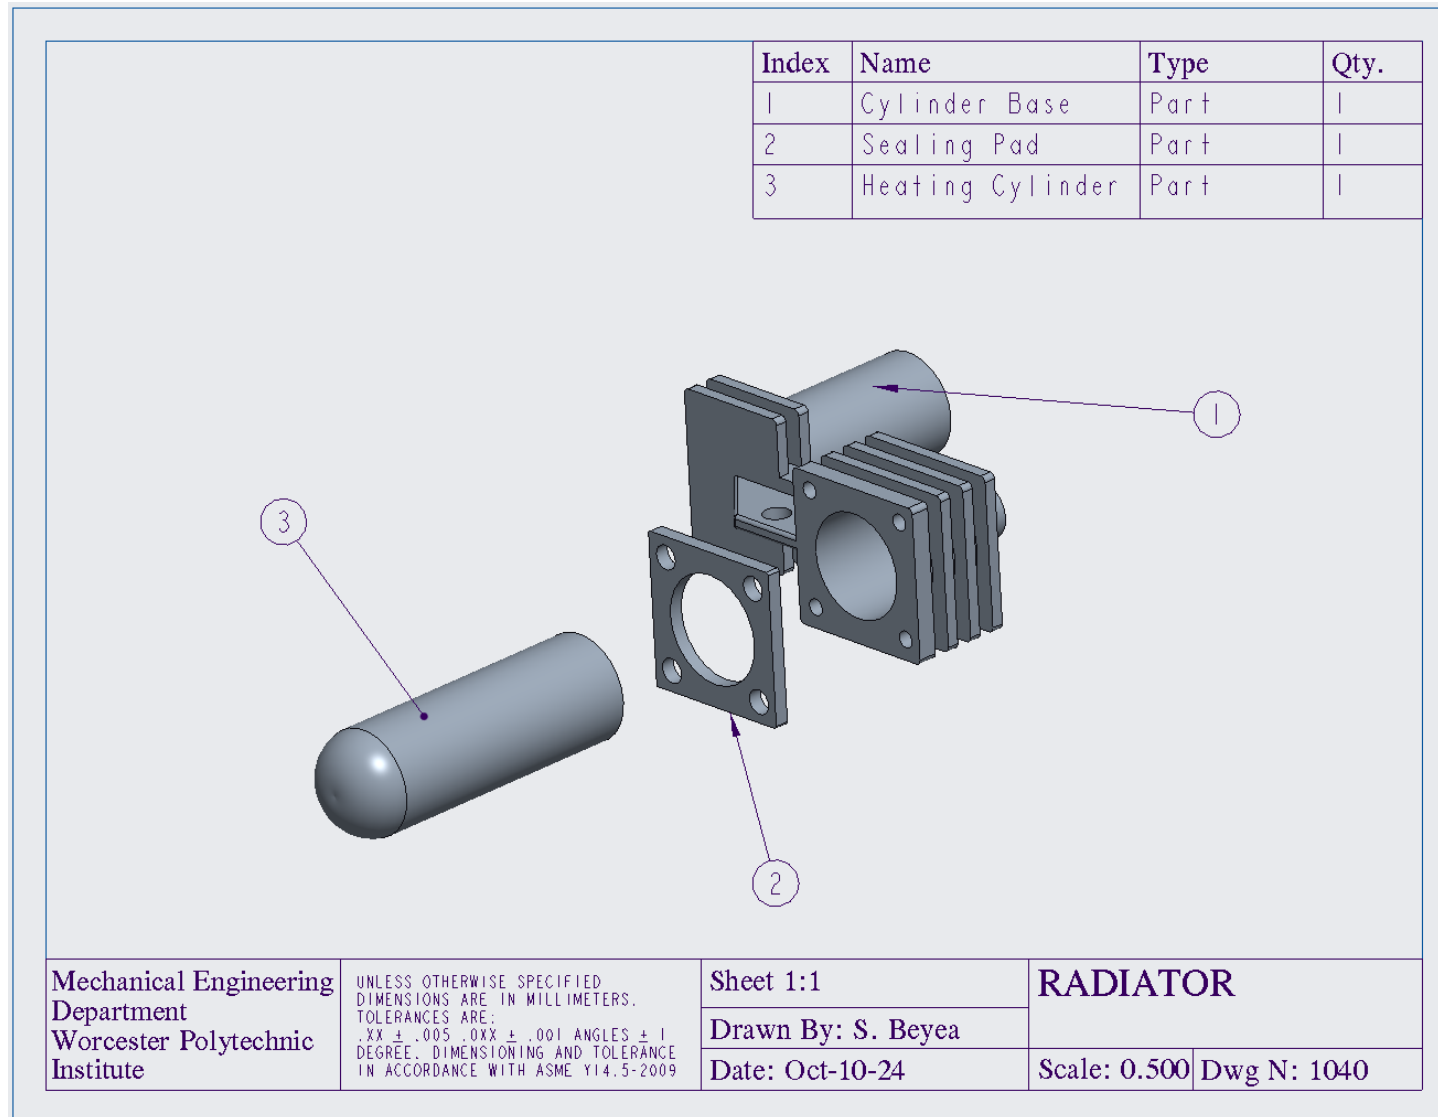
exploded view of the radiator assembly (with balloons and BOM).
